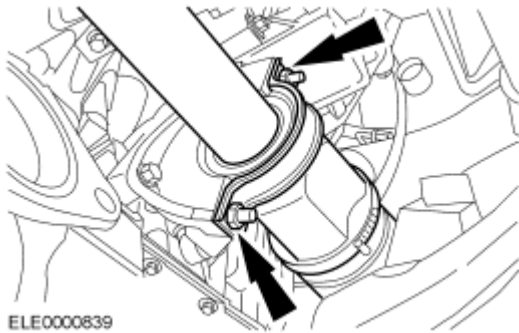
Locating Intermediate Shaft Bearing Bracket Nuts
